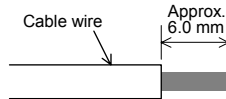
Recommended Strip Length of the Cable Wire End for Terminal Connection
